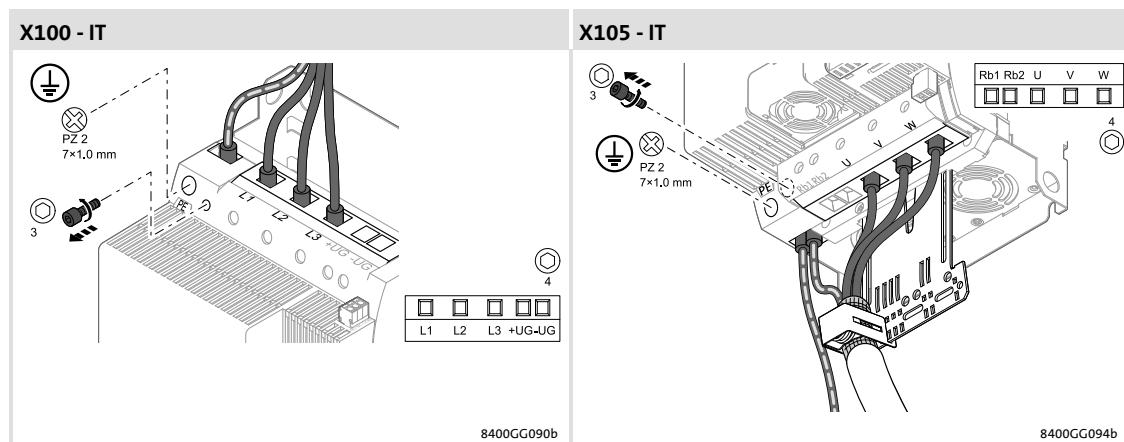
Removal of the contact screws for device size GG7 (on the supply side and on the motor side)
